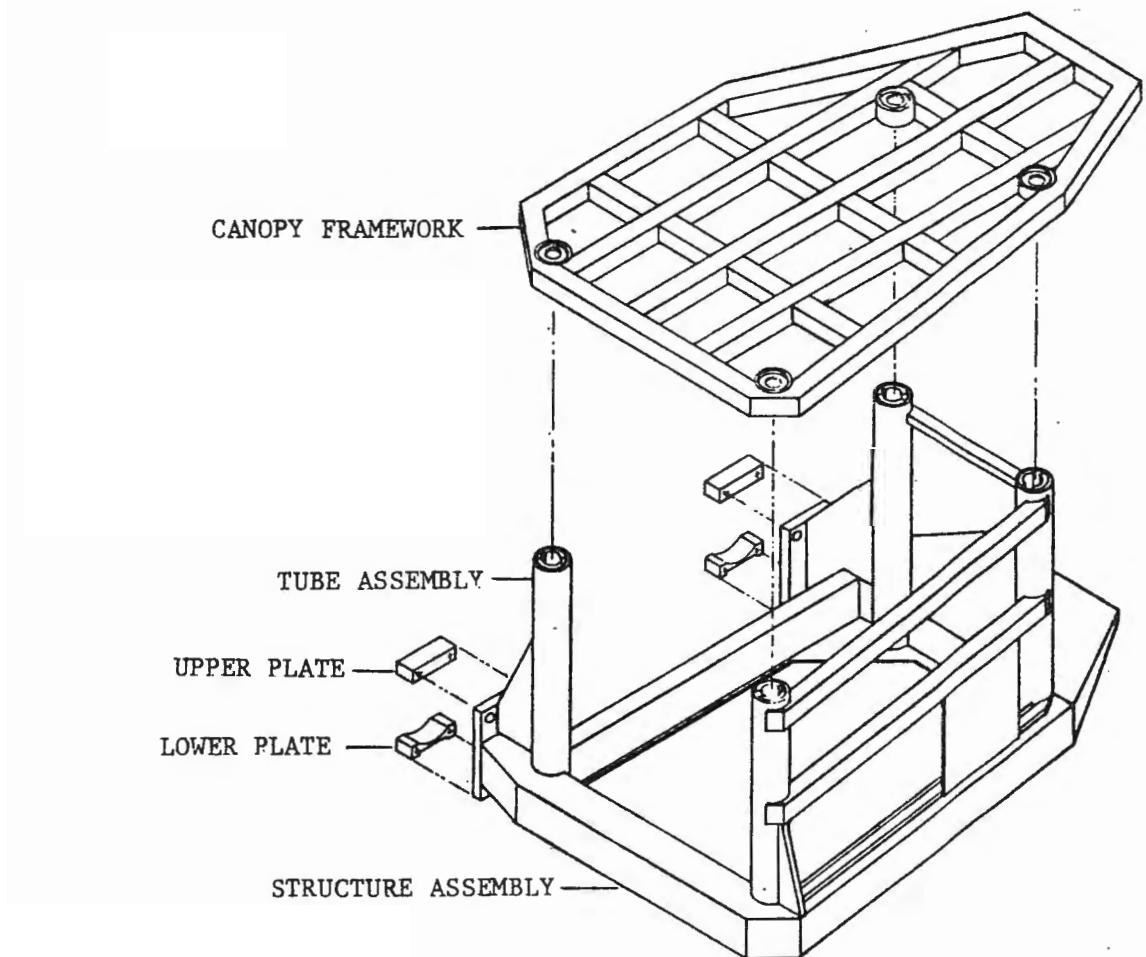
Skeleton Exploded View of Loader Protective Canopy
